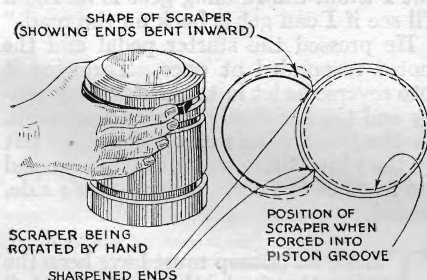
A carbon scraper fashioned from an old piston ring makes an ideal tool to remove the carbon from the ring grooves in the piston
